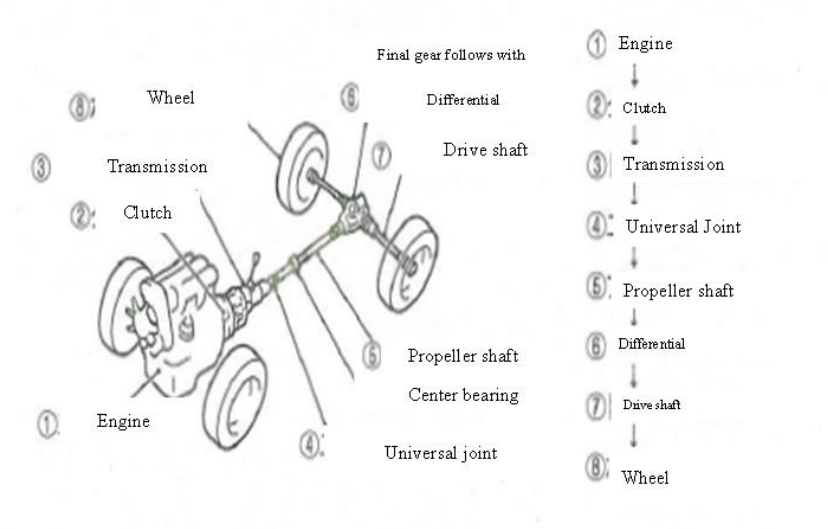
Power transmission device (Front engine and Rear drive type)
